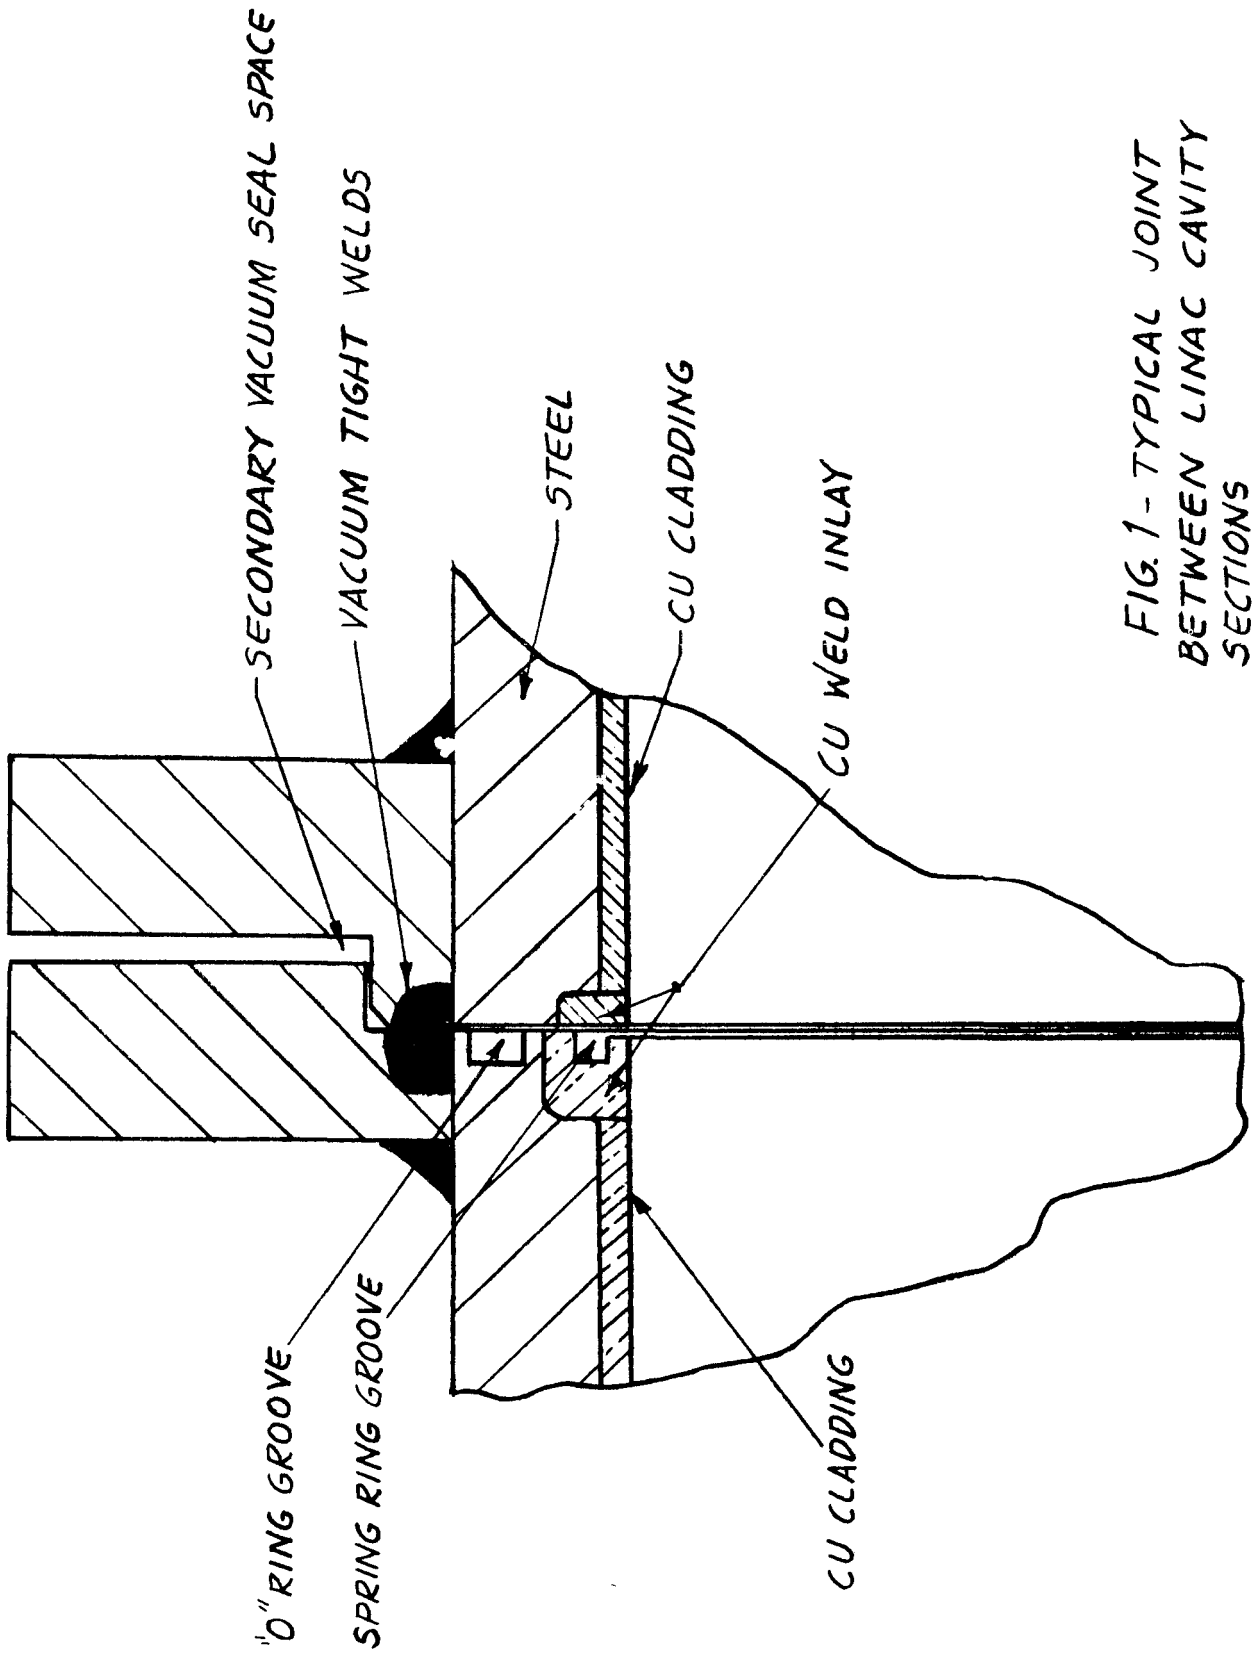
TYPICAL JOINT BETWEEN LINAC CAVITY SECTIONS
